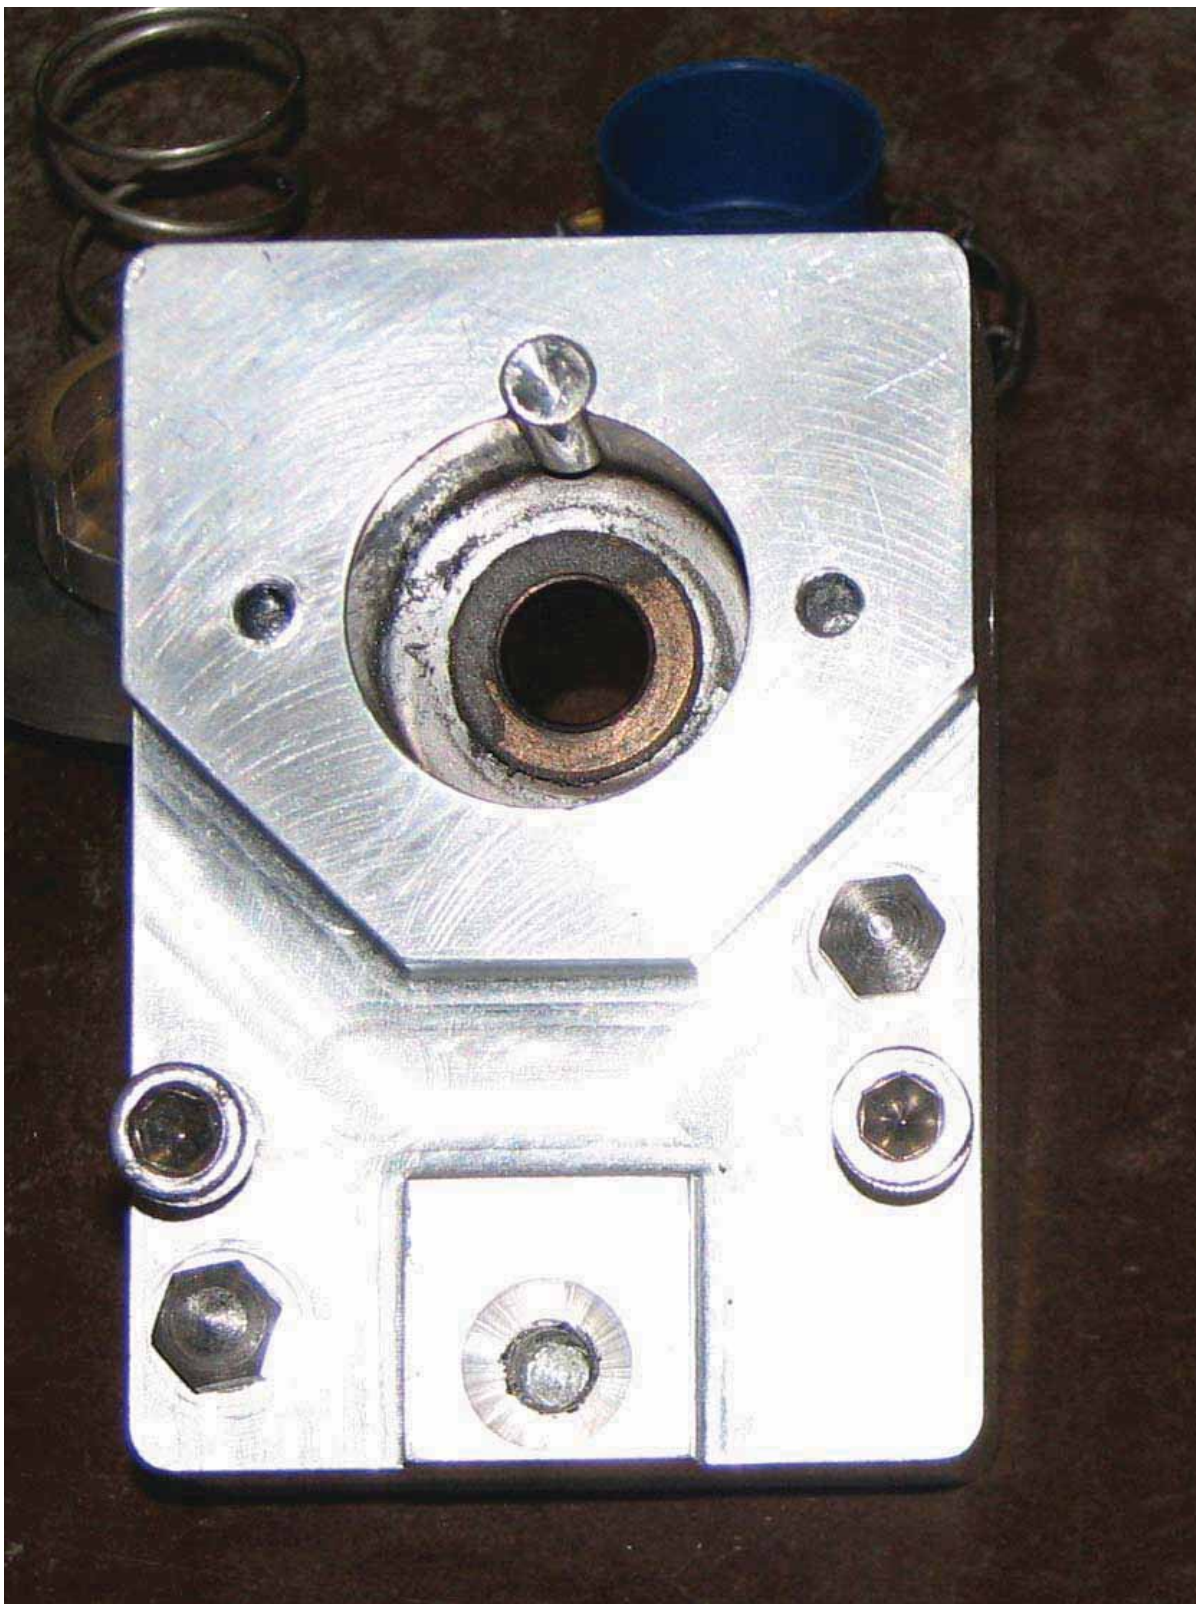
Material Coating the Sampler Surfaces Following Steel Sampling
